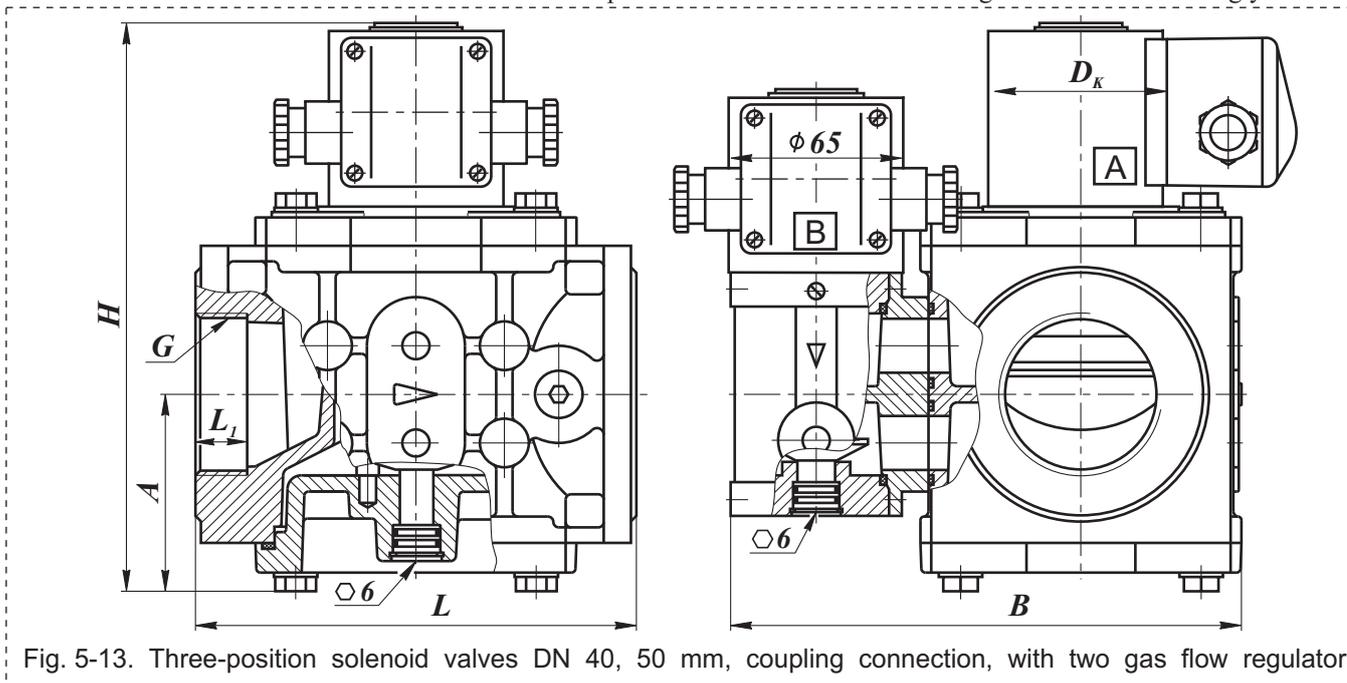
Three-position solenoid valves DN 40, 50 mm, coupling connection, with two gas flow regulator
